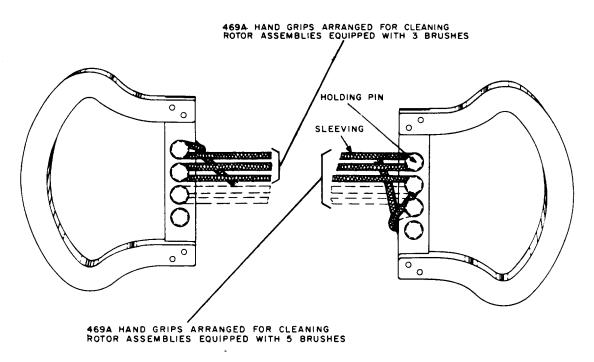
469A Hand Grips Arranged for Cleaning Rotor Assemblies Having 3 or 5 Brushes
